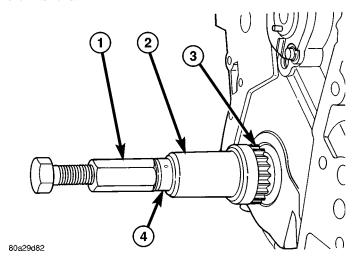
CRANKSHAFT SPROCKET - INSTALLATION
